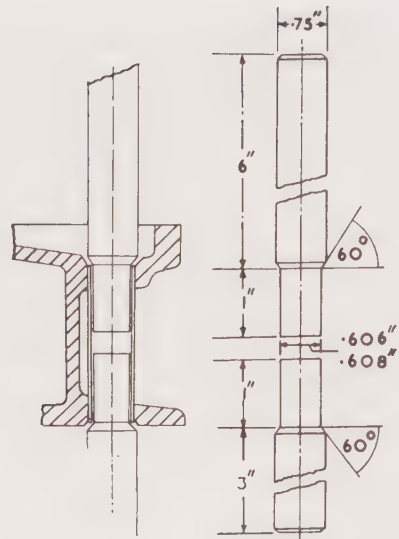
52 Mandrels for swaging push-rod tube ends to remedy oil leaks on early engines.
